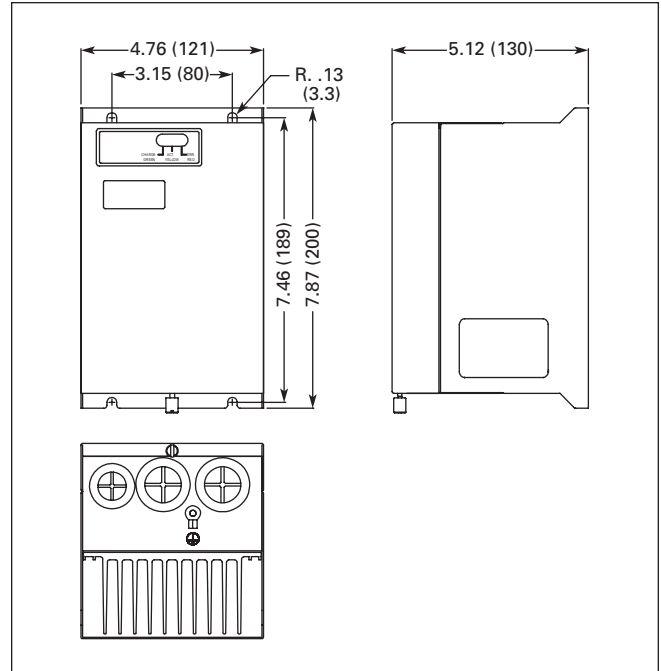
Braking Units — Approximate Dimensions in Inches (mm)
